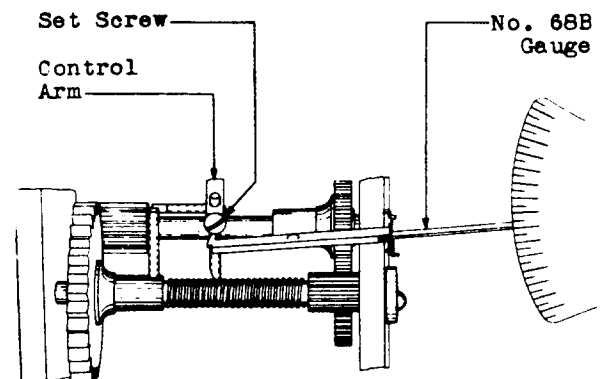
Method of Checking Control Arm Retractable Spring Tension
